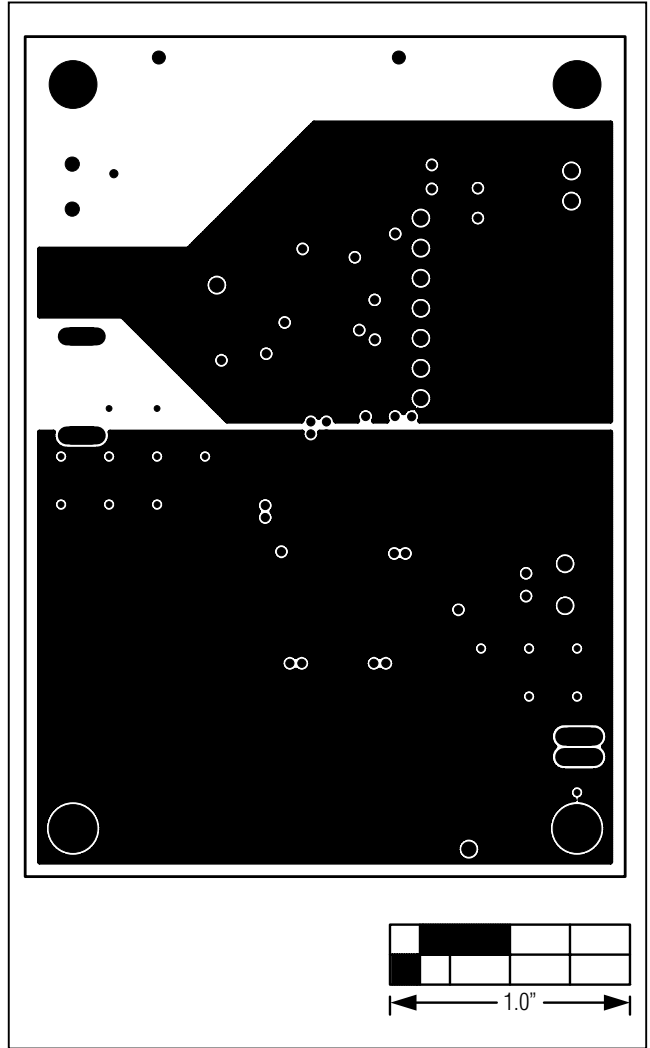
MAX17409 EV Kit PCB Layout—Internal Layer 3 (GND/PGND Layer)
